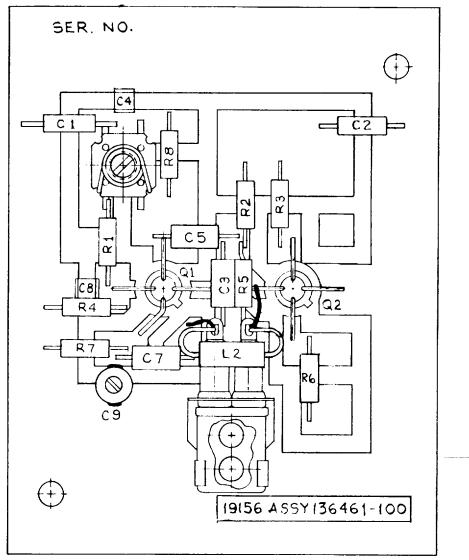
Oscillator Circuit Card Assembly, 1A4A3A1 Parts Location Diagram
